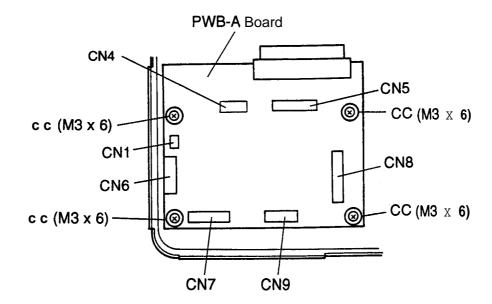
Removing the Engine Controller Board (PWB-A)
